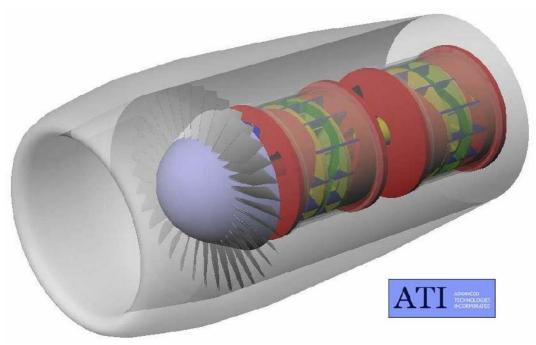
Rendering of PAX 150 engine with 2-rotor diesel core engine.
